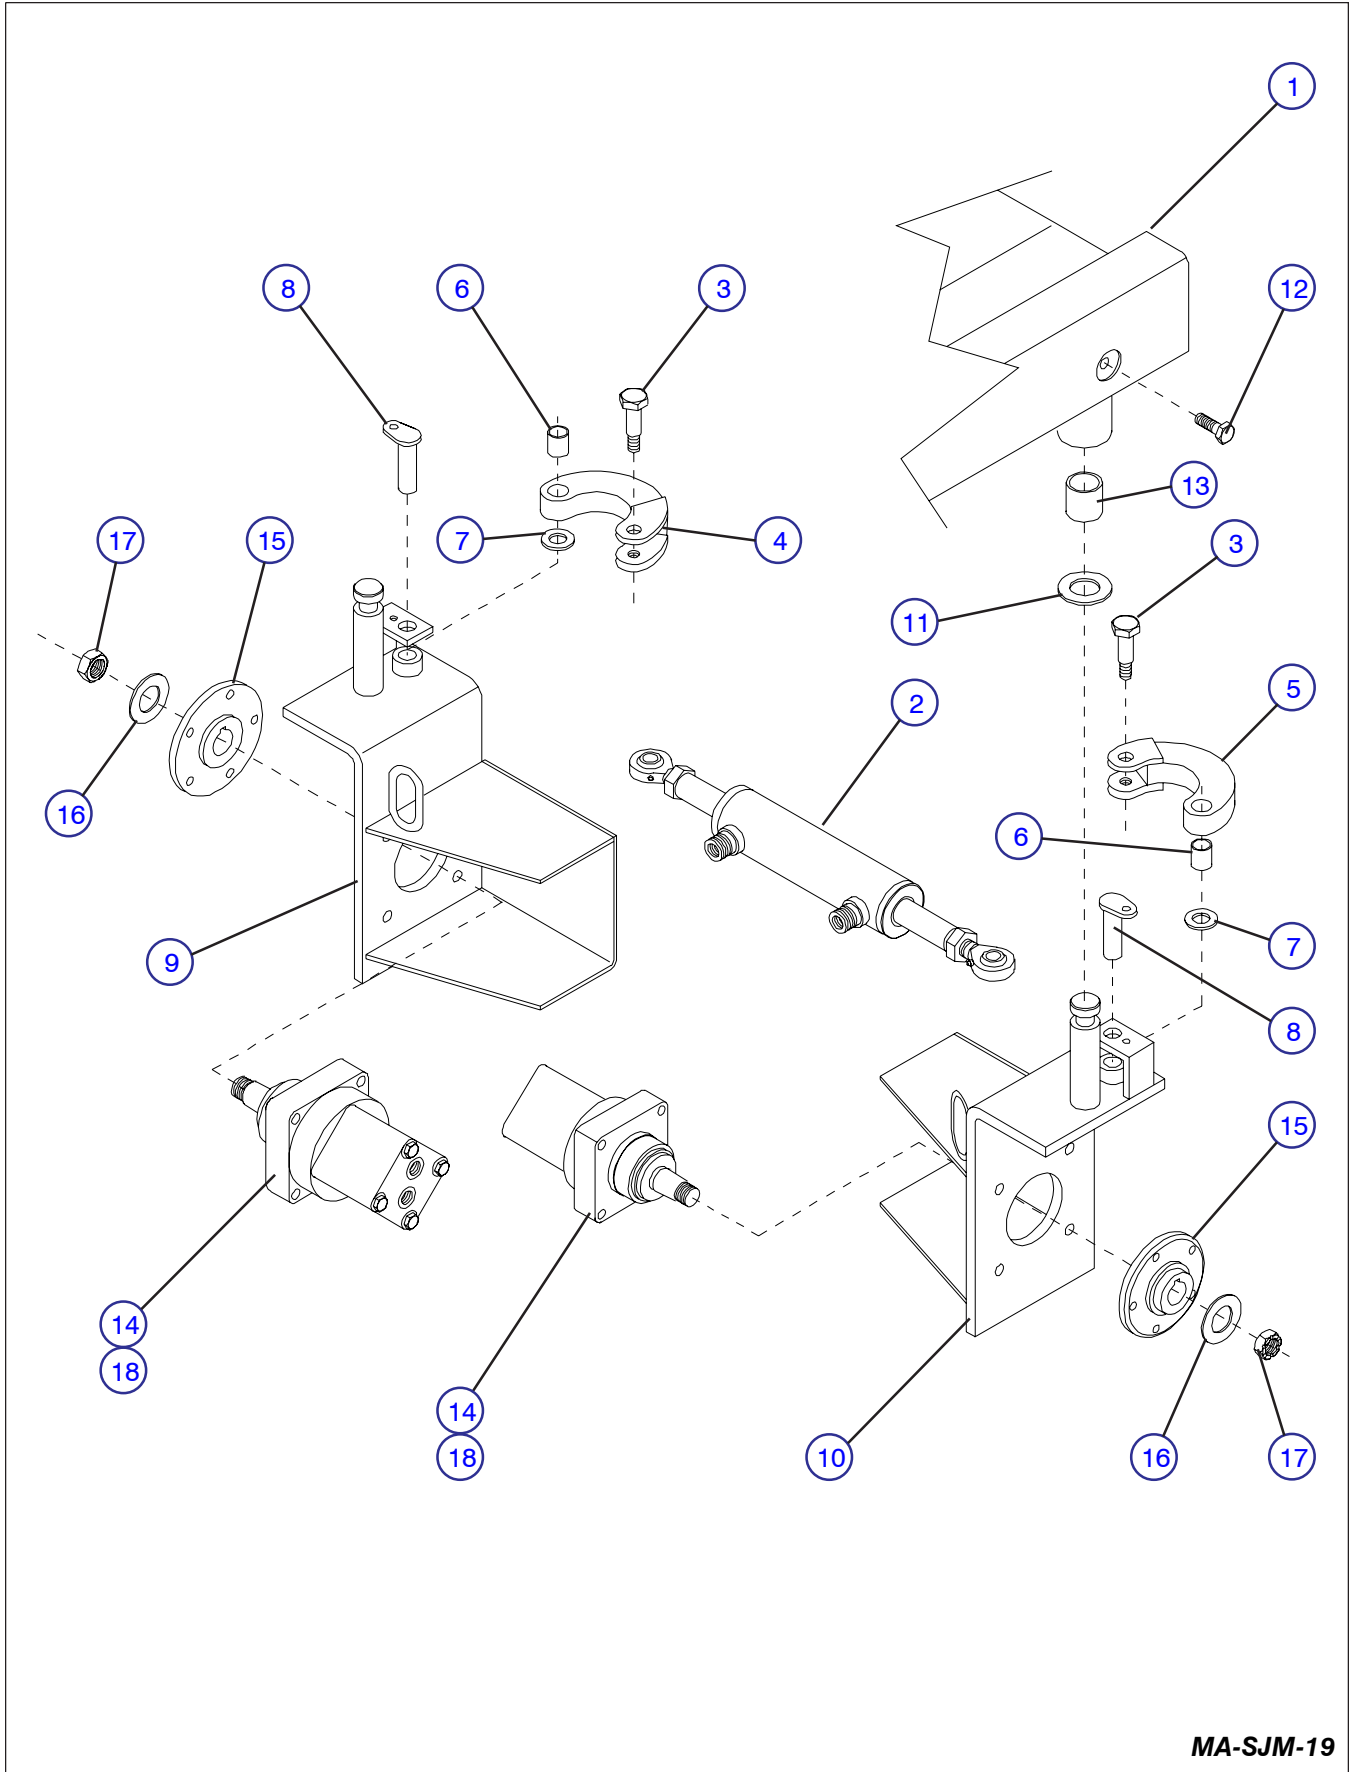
B. STEER CYLINDER ASSEMBLY
